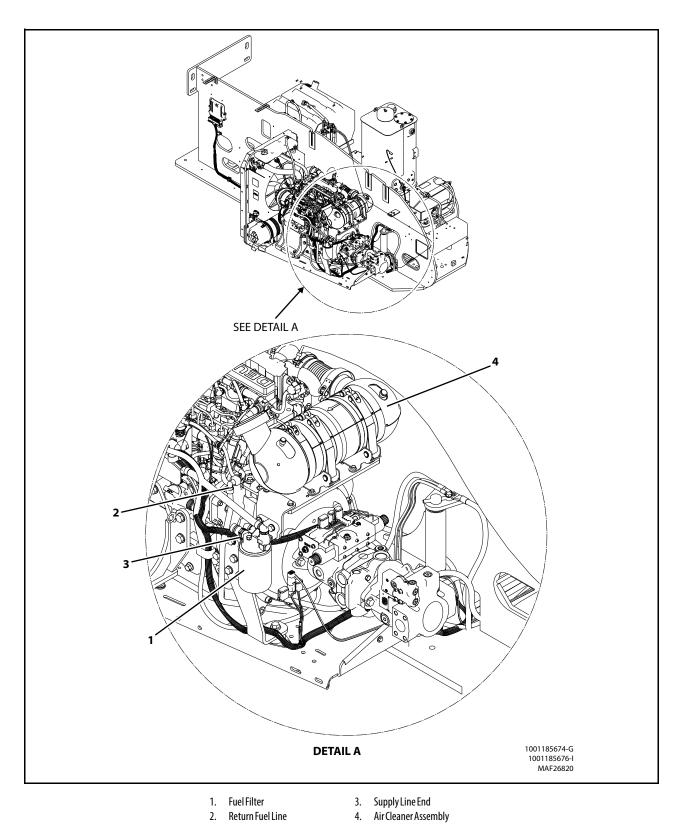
Deutz TD2.9L4 T4F Engine Installation - Sheet 1 of 7
